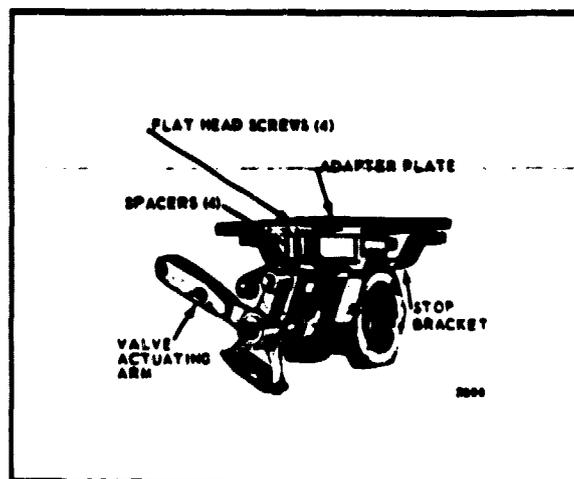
RELATIONSHIP OF PARTS IN V51E.
